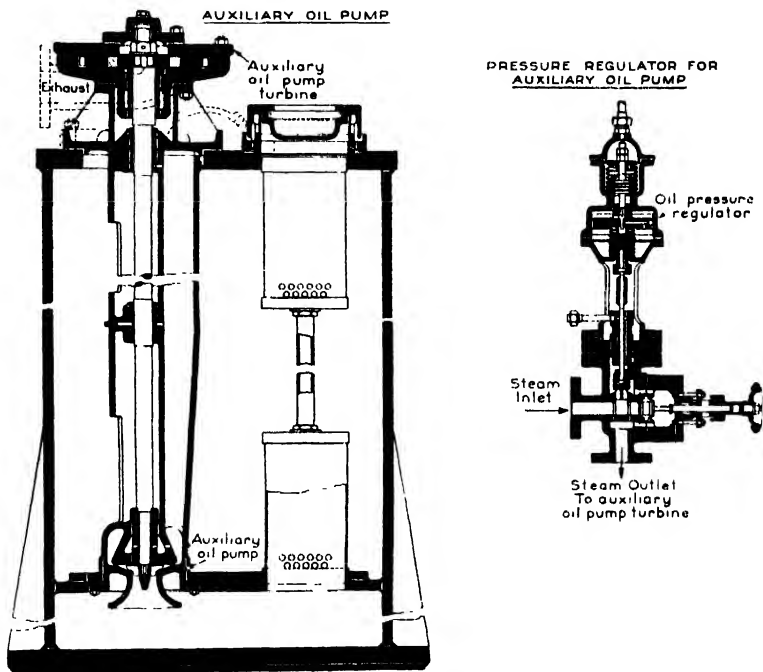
Sectional Elevations showing Assembly of Auxiliary Oil Pump and Pressure Regulator for Pump. (British Thomson-Houston Co. Ltd.)
